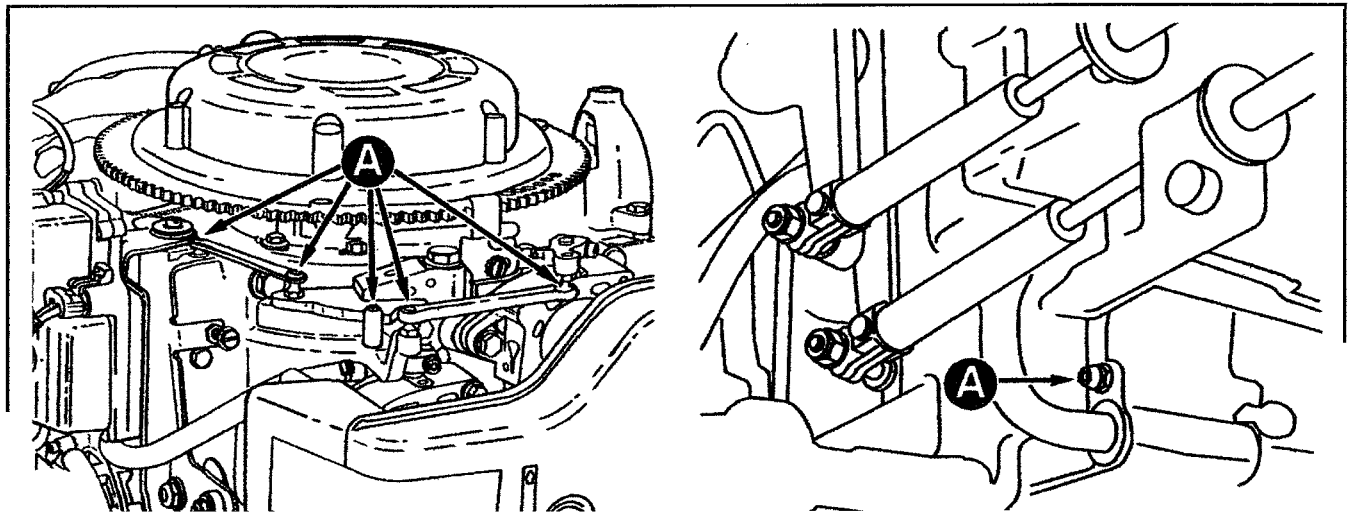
Throttle and shift linkage lubrication points-200-250 hp V6 FICHT motors
